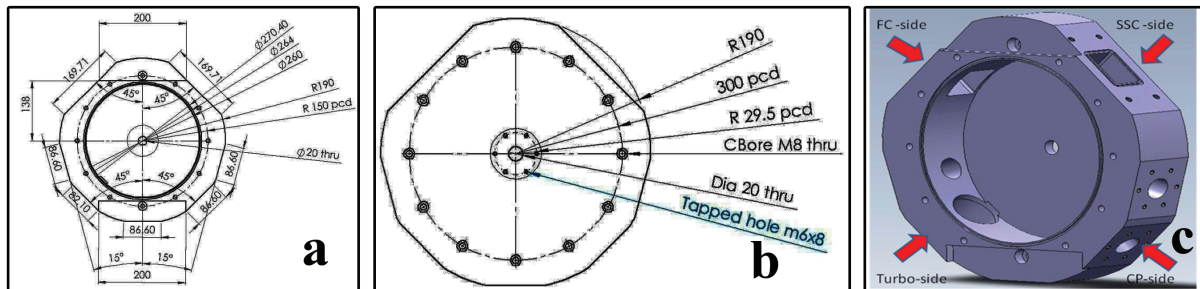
(a) CDB front view (b) Back side view and (c) 3D model isometric view
